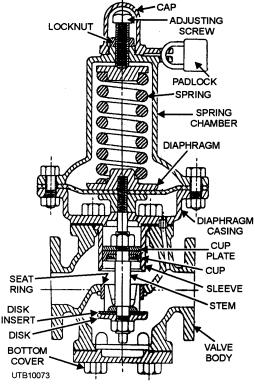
Spring-loaded diaphragm type of pressure-reducing valve.
